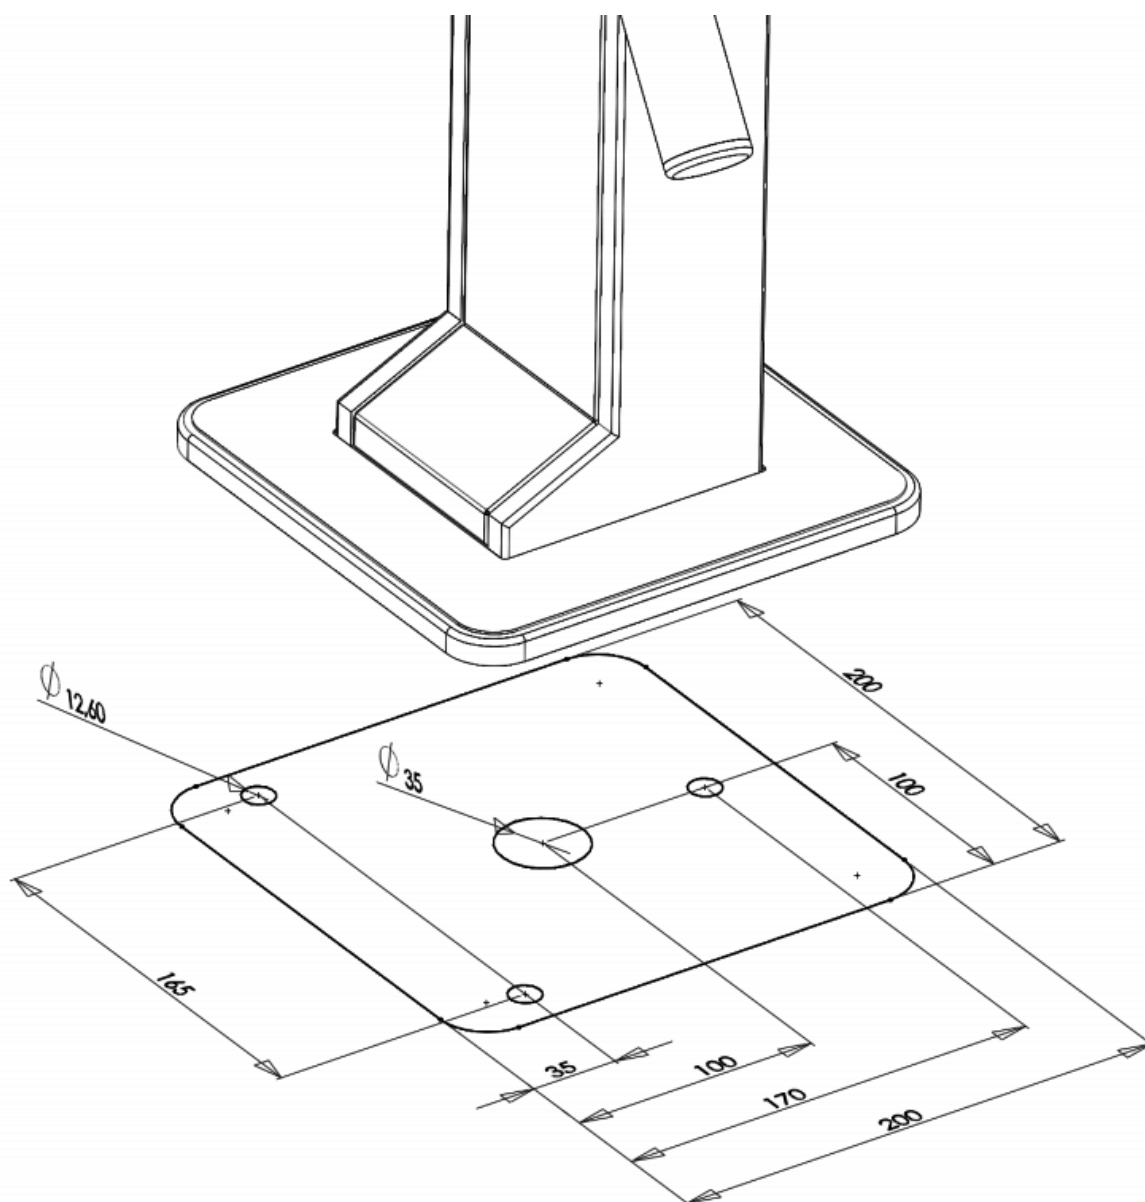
Position of mounting holes relative to the external dimensions of the turnstile
